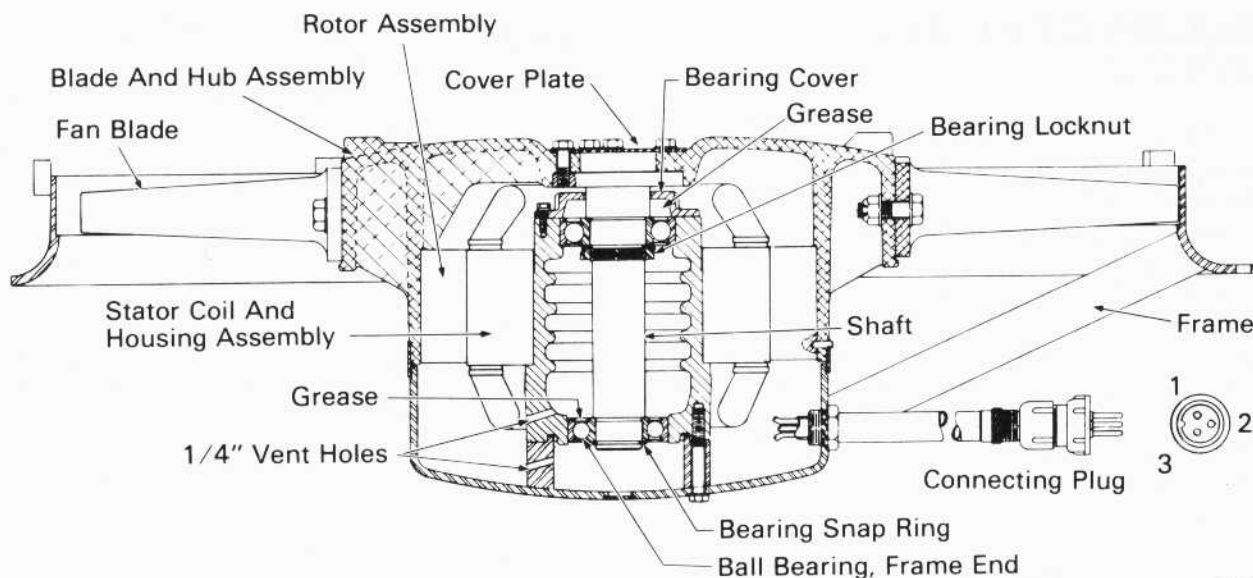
Cross-Section Of Cooling Fan Assembly
